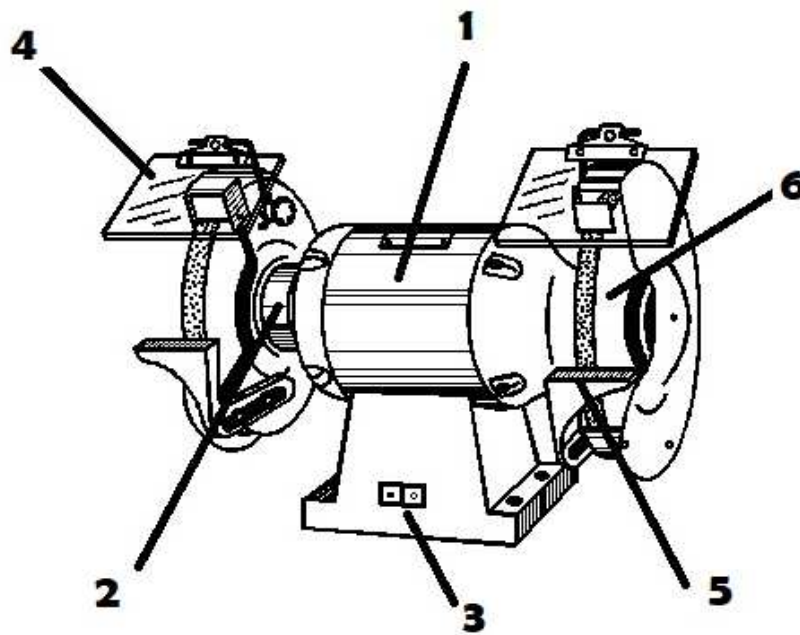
Differentiate parts of a bench grinder. Source: www.metalartspress.com
